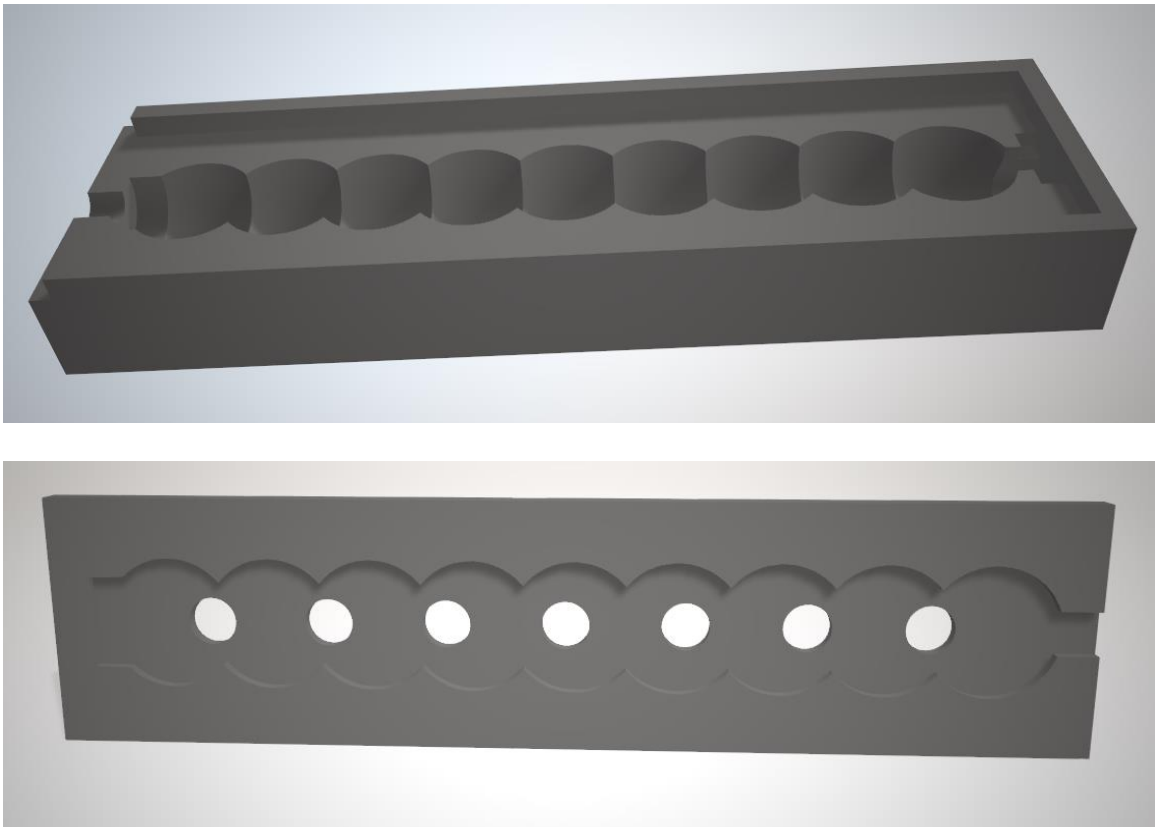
Assembly of Mold (Core, Bottom chamber and Top Cover)
